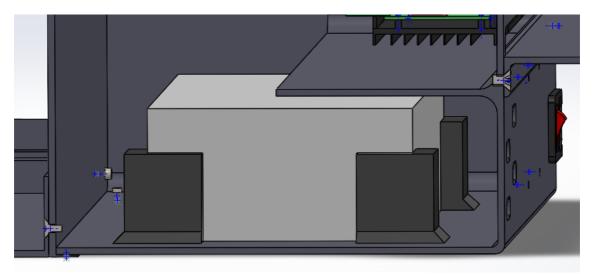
Power supply sliding in the lower part of the back assembly supported by rubber parts having adhesive connection with the base.
